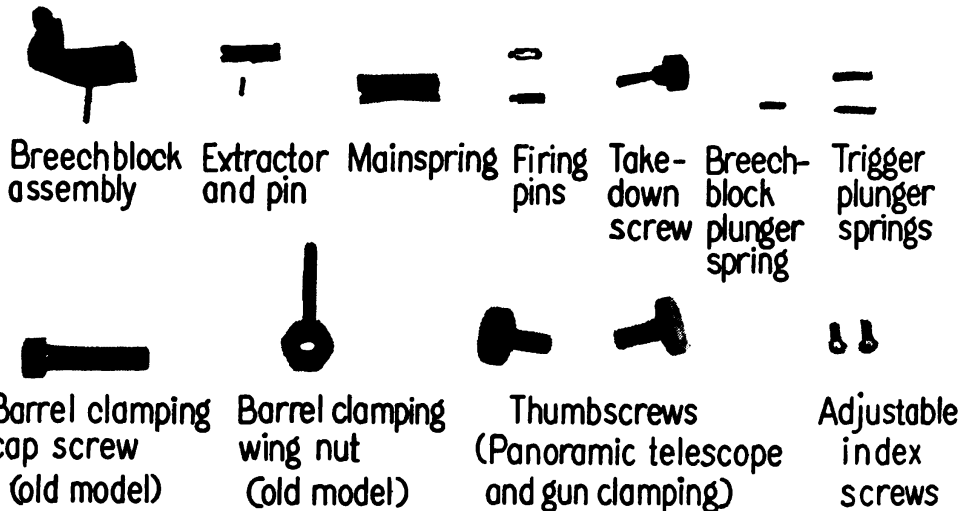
Field artillery trainer gun, M2, showing disassembly for cleaning.
